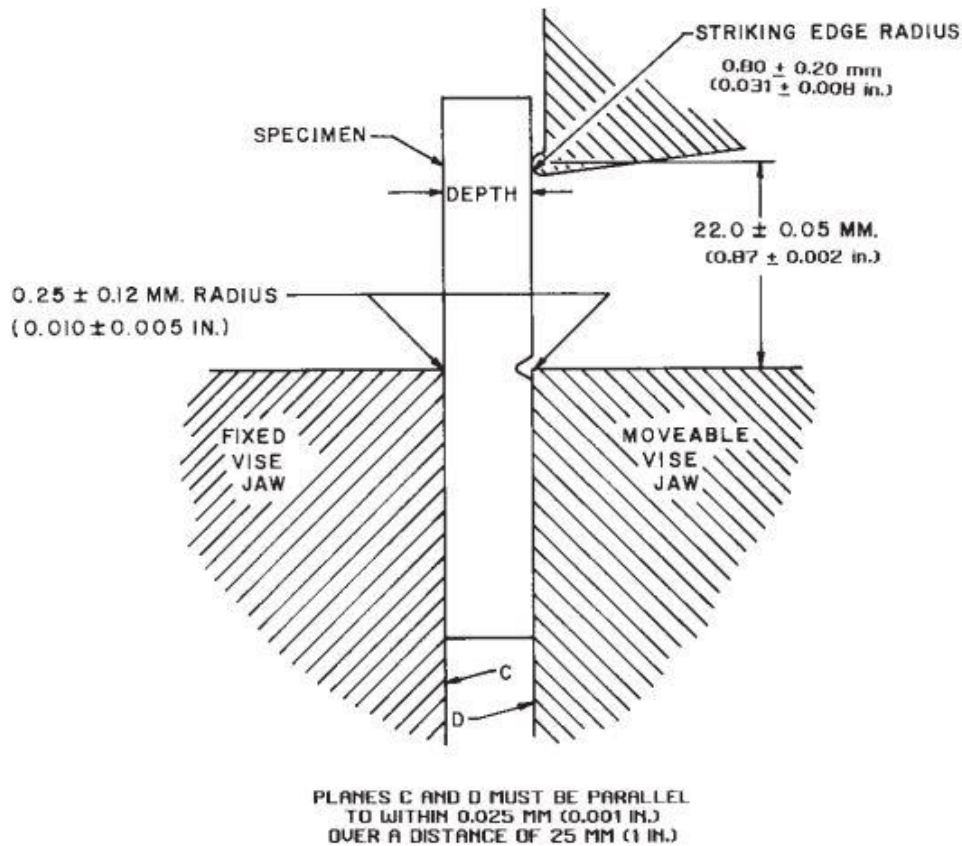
Schematic of the Clamp, Specimen & Striking Hammer in Izod Impact Test [11]
